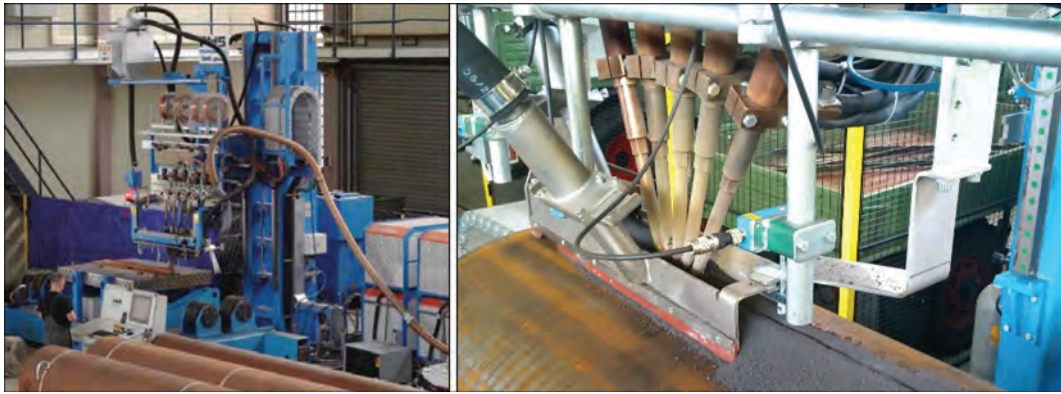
Five-wire SAW test stand for welding sheets and tubes at Fraunhofer IPK in Berlin (left) and multi-wire SAW welding head (right)
